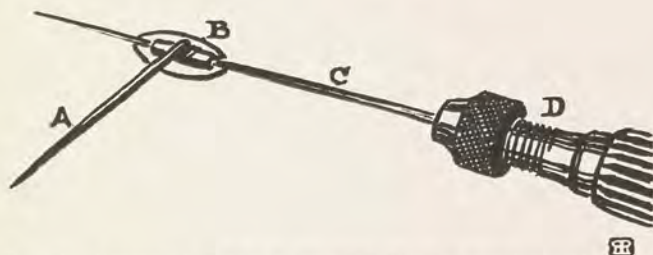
Reaming the hole in the joint (B) of a brooch pin (A) with a steel broach (C), which is held in the pin tongs, or tool holder (D).
